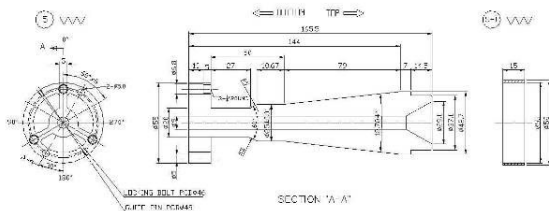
Improved design of the tube neck and reducer of a fuel capsule
